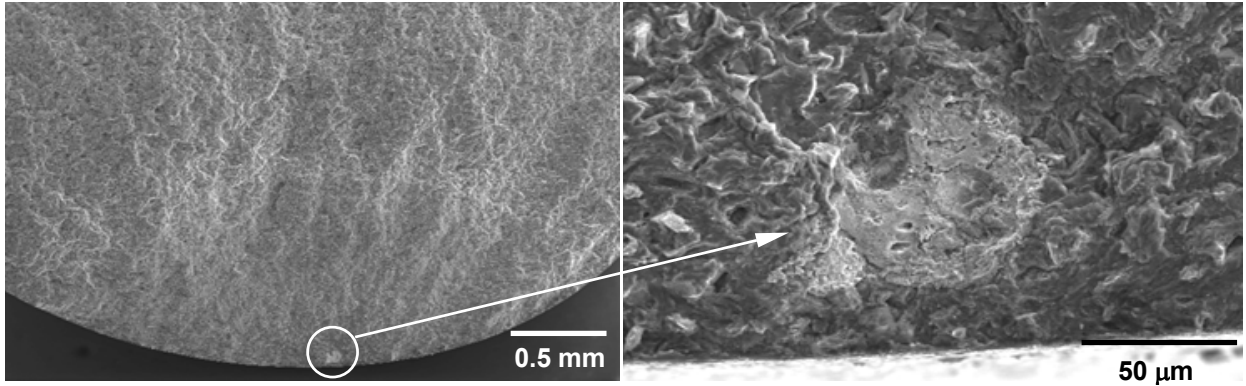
Fatigue fracture in DRA. Crack initiation takes place at rogue inclusions, primarily at the specimen surface.
